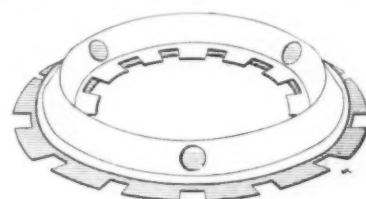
PLATE SHOWING HOLES FOR LUBRICANT.
